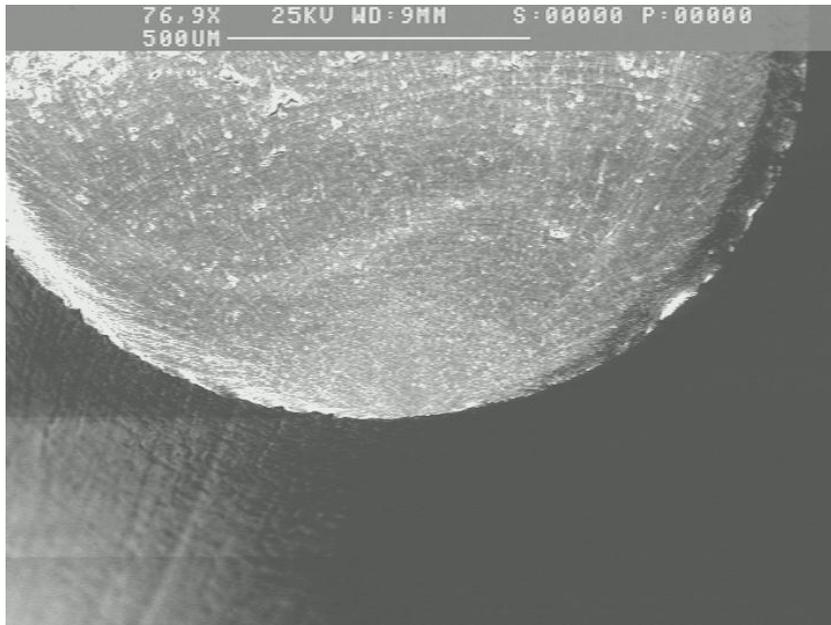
This spring, designed within normal design rules, was made to drawing for an application that was not disclosed by the end user, so the spring maker could not advise of the risk of fatigue failure after 120 thousand cycles. If material suitable for a dynamic application had been used the spring would have survived for the required 200 thousand cycles.
